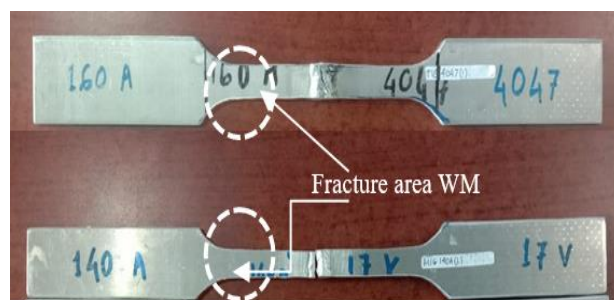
Fracture area joint Al6061 using GTAW (Er 4047)
